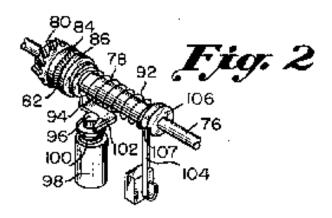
is a detail perspective View of the positive cyclic clutch mechanism which can be seen below the typewheel in FIGURE 1 and which controls the camshaft cycles of rotation, the length being exaggerated for purposes of clarity.
